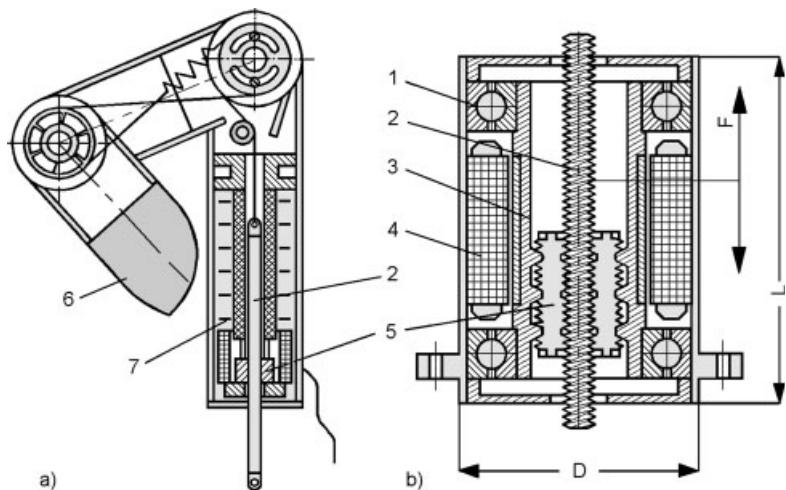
Bending finger and DLR planetary roller spindle drive (Wittenstein)
